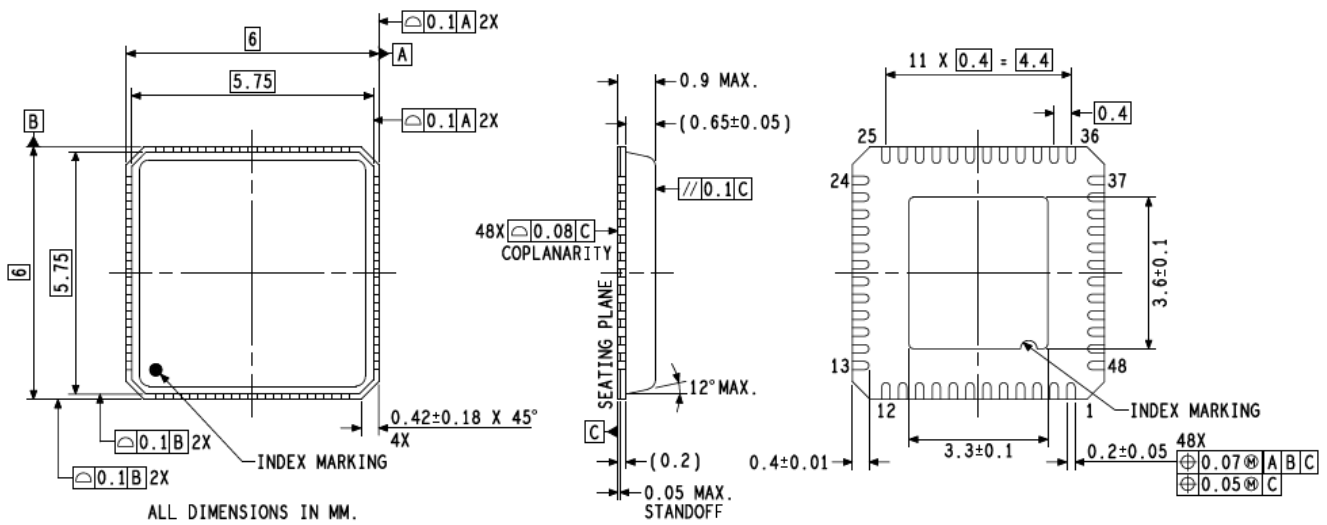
48-lead punched sawn QFN, 6mm x 6mm Package Dimensions
